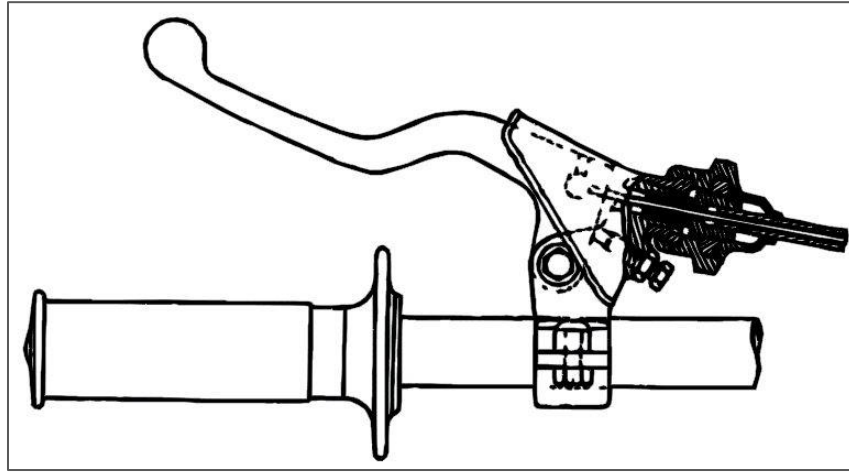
Clutch pushing lever mechanism in motorcycles [18]
